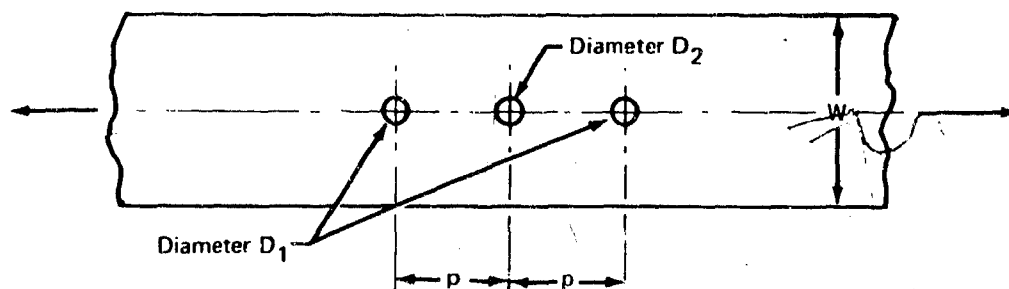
Location of Fatigue Cracks on Panel 2
